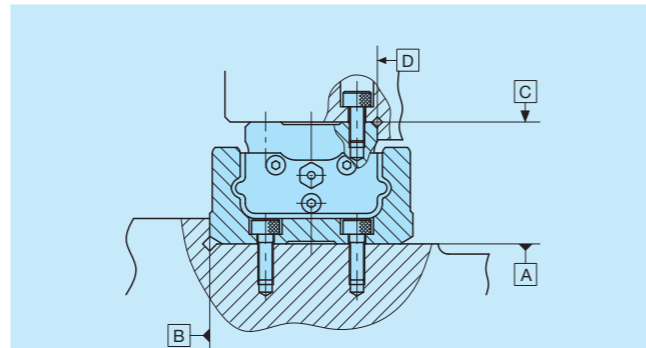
Reference mounting surfaces and general mounting structure of Linear Way and Linear Roller Way
